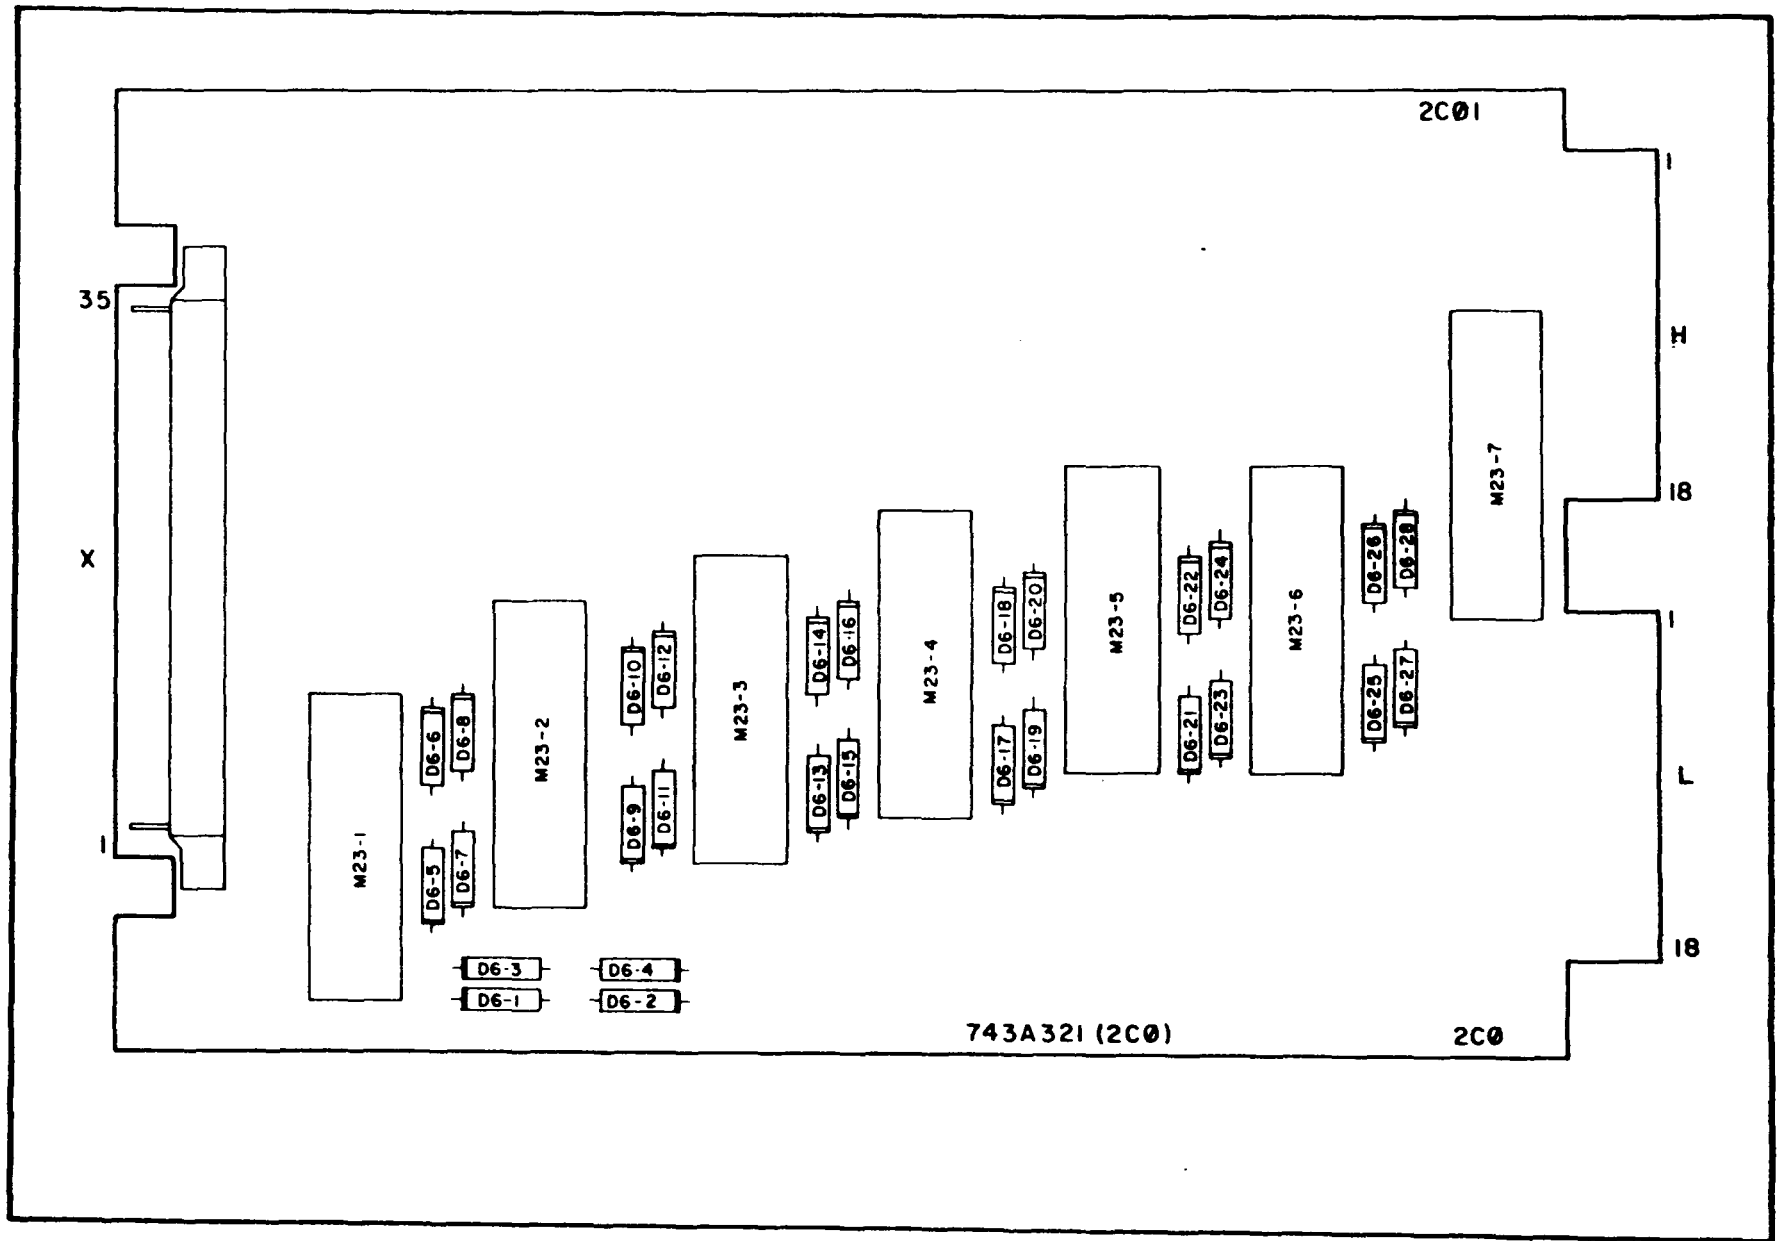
2C02 ASSEMBLY (REF. DWG. 743A321, SUB 9)
